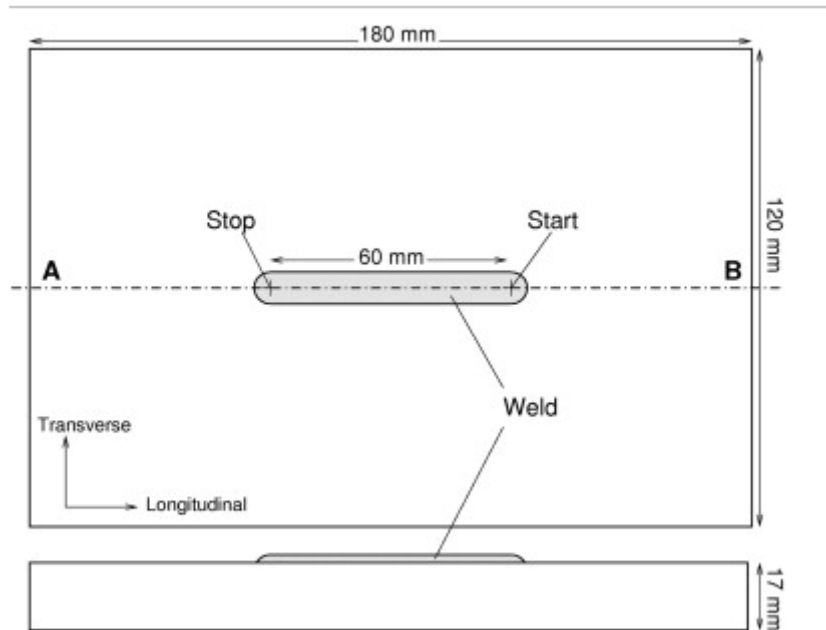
Nominal dimensions of bead on plate specimen [32]
